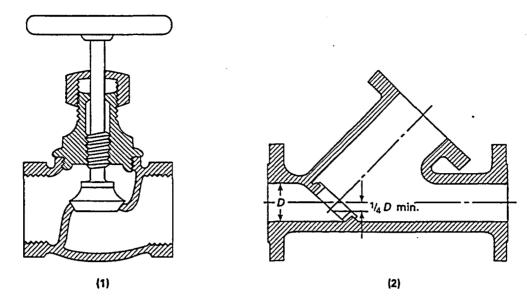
(C) TYPICAL GLOBE VALVES
